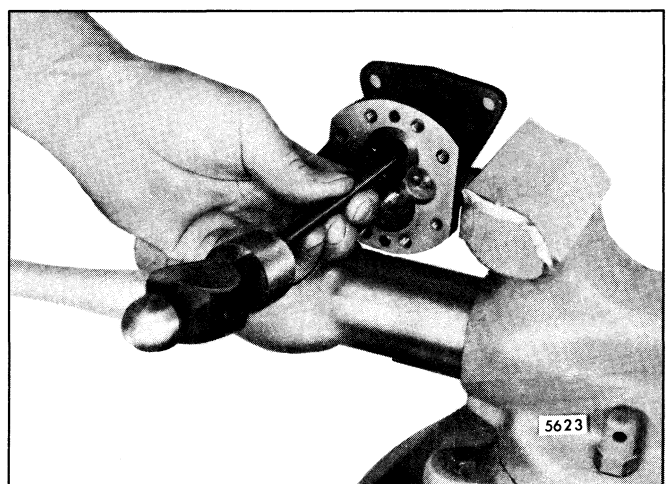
Removing Oil Seals from Fuel Pump Body using Tool J 1508-13
